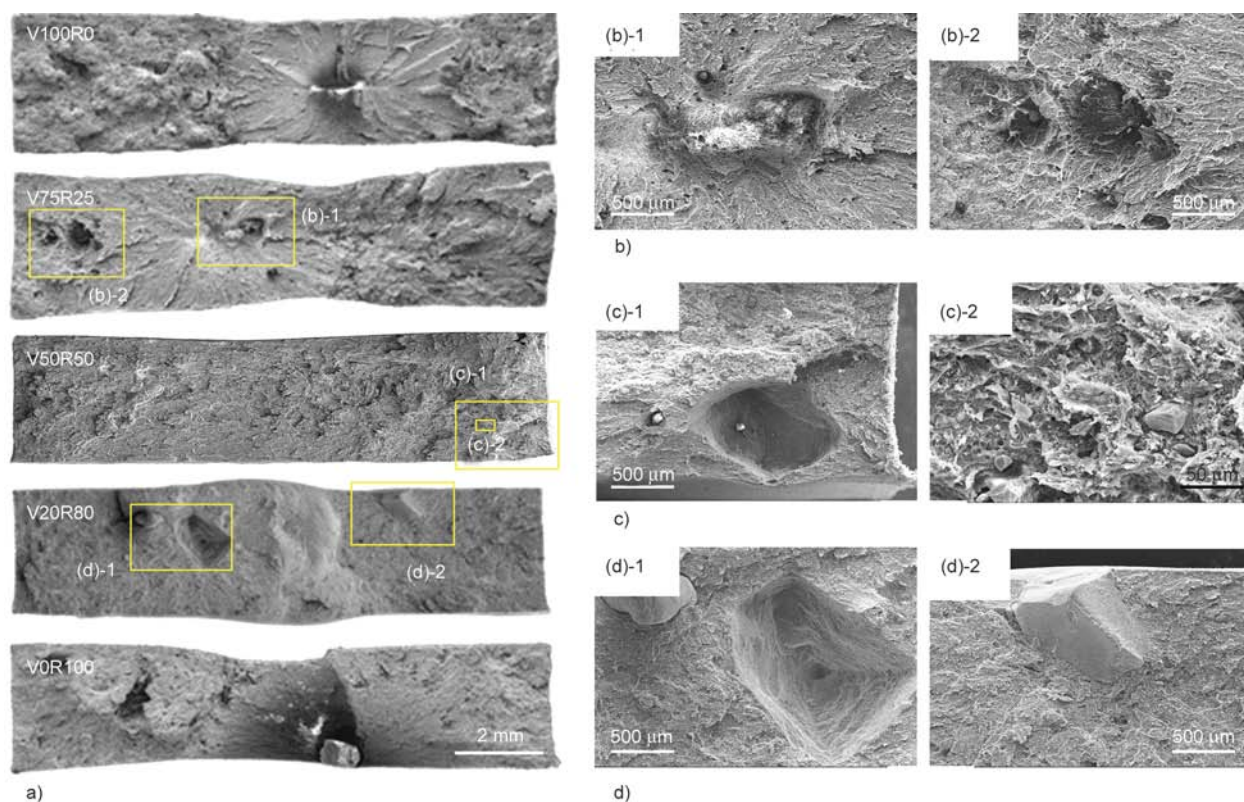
Fracture surface of samples under tensile loading condition; (a) whole surfaces of all samples, (b) V75R25, (c) V50R50, (d) V20R80
